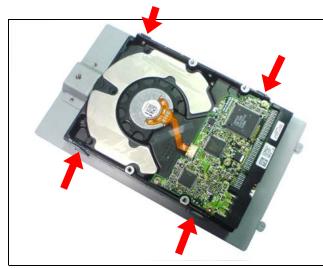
Fasten the four screws to lock HDD and bracket together.
